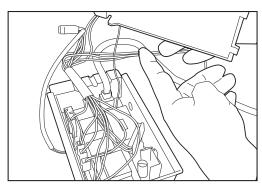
Remove cover from module. NOTE: This module is held in position with double-sided tape and should be gently forced upwards to release.
